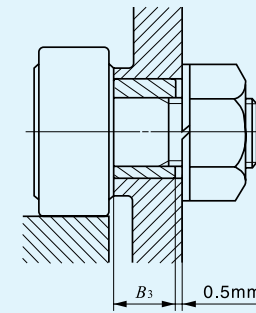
Length of the mounting hole of Eccentric Type Cam Follower
